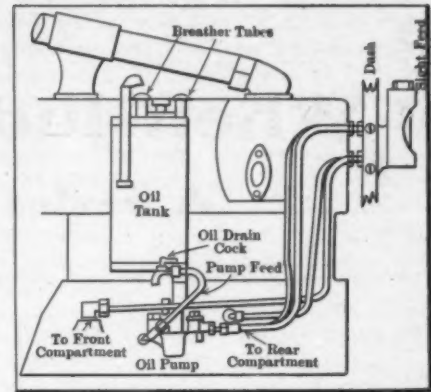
Oil tank and connections for lubricating Packard cars of the latest type
